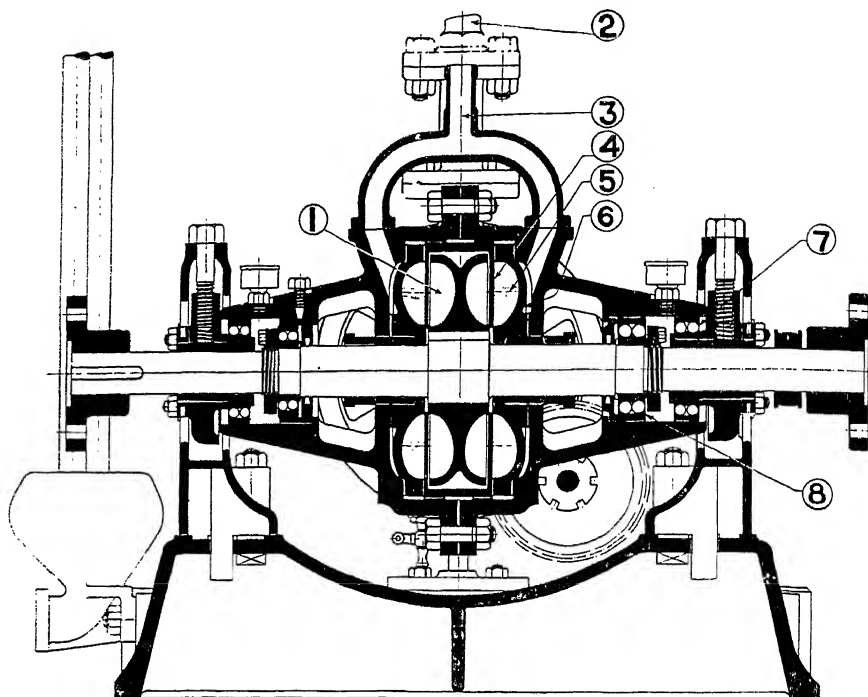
ELEVATION THROUGH CASING OF FROUDE DYNAMOMETER, TYPE D.P.X.
